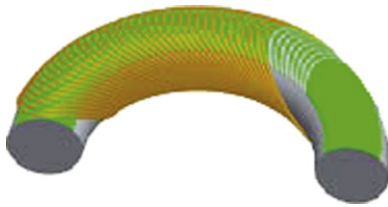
Drawing showing initial coil design concept with the coils touching the inner radius. They also touch on the outer radius.
